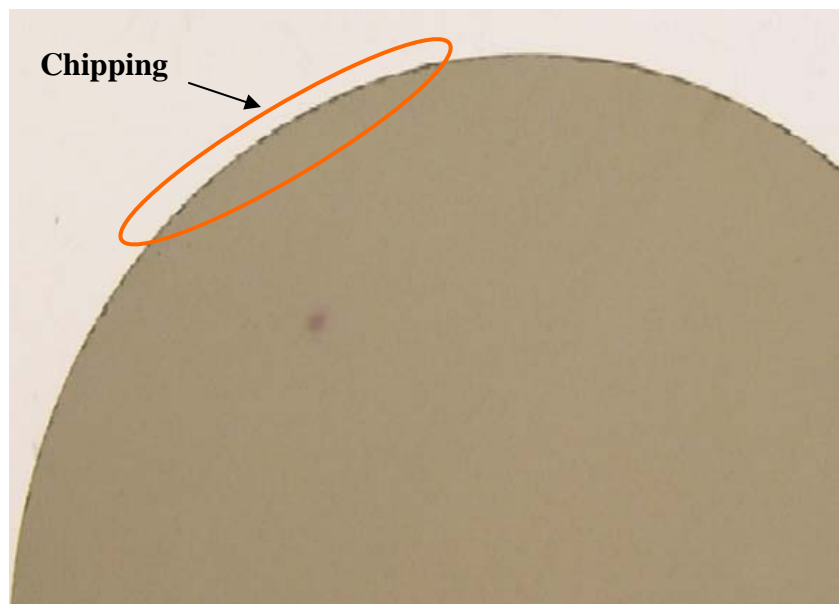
Edge of circular PMN-PT sample cut using a diamond coated core-drill bit
